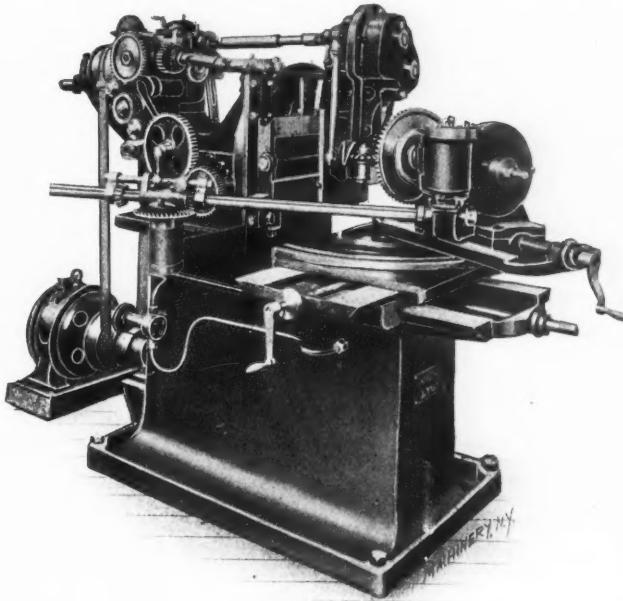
The Chambon Continuous Bevel Gear Hobbing Machine, employing the Cutters shown in Fig. 178.
